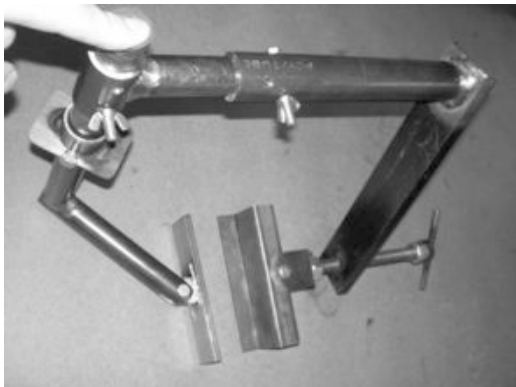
The pressure clamp developed for HDPE plastic welding of handles to jerry cans. The left arm is inserted into the jerry can, while the right arm applies pressure on the outside of the container.
